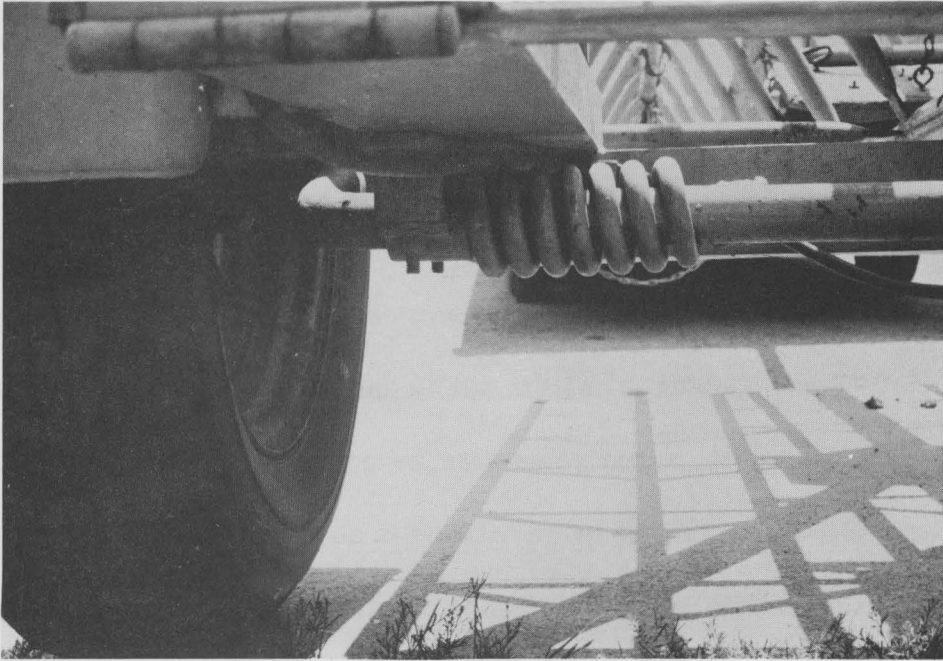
Prior-Linco (Level Load) Suspension Axle.
